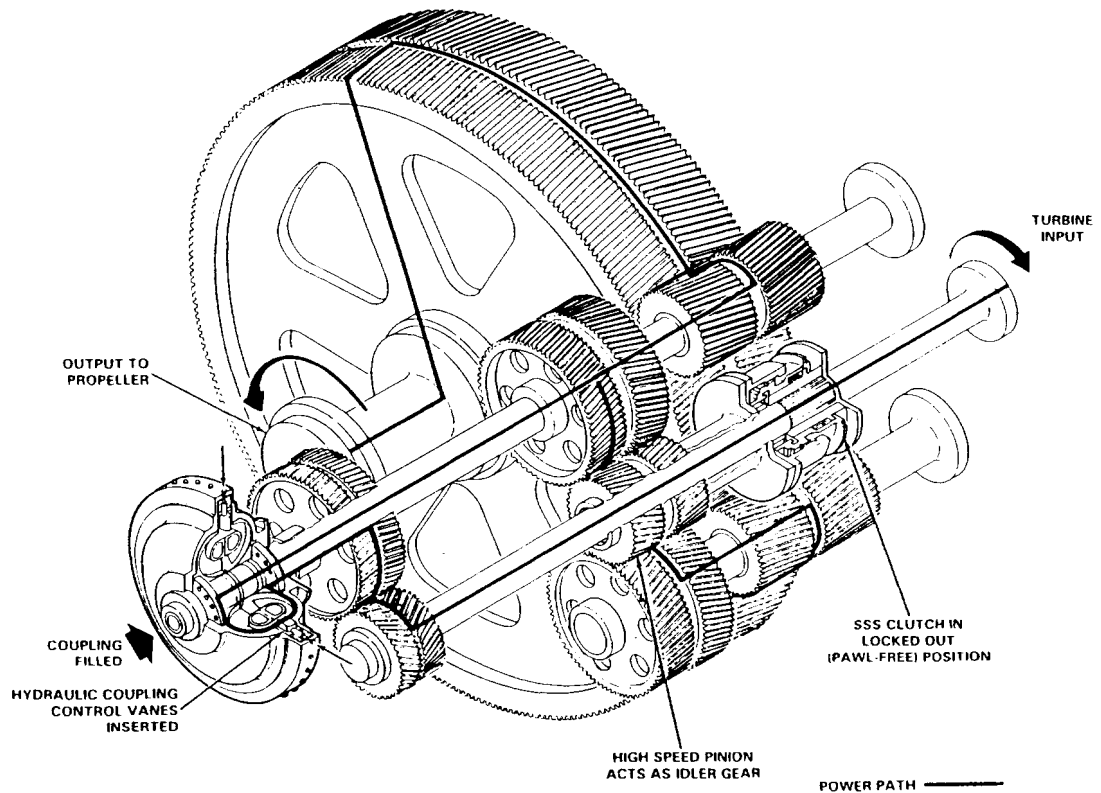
REVERSE REDUCTION GEAR WITH FRANCO-TOSI COUPLING: MANOEUVRING ASTERN OPERATION
